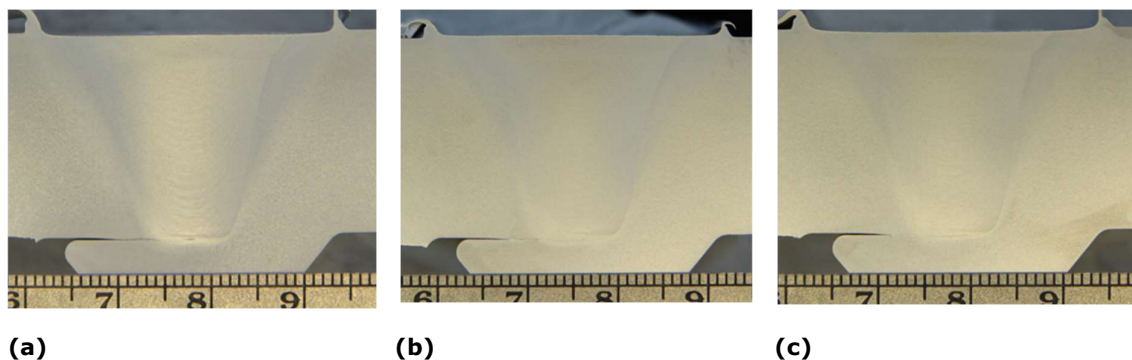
2_Gap_23mm weld macrography at (a) start, (b) middle, and (c) end
